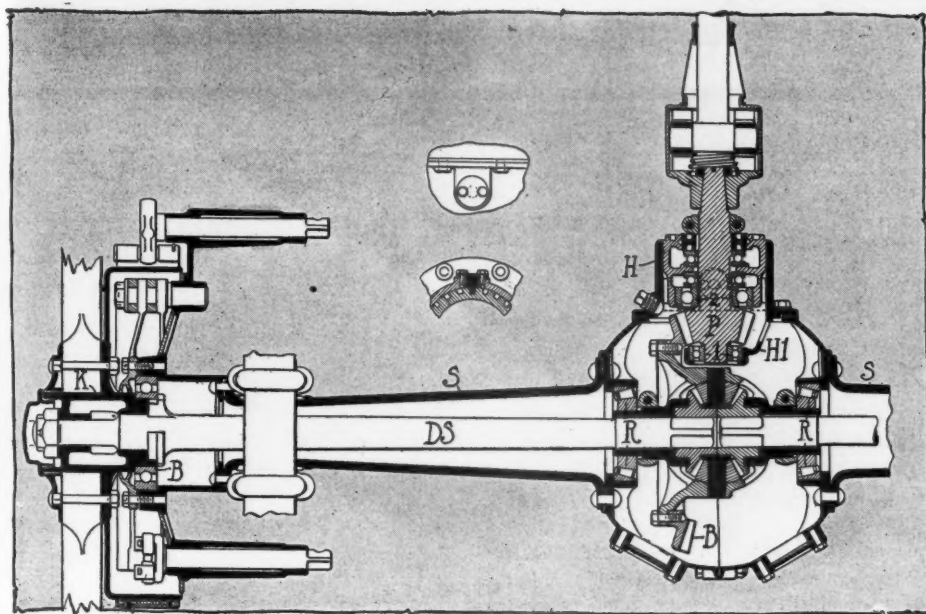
STRUCTURAL DETAILS OF PREMIER REAR AXLE SHOWING HOW THE PINION P IS INTEGRAL WITH ITS SHAFT AND IS CARRIED ON TWO RACES 1 AND 2 OF SCHAEFER BALL-BEARINGS. THIS PINION IS WITHIN A CASTING H1
